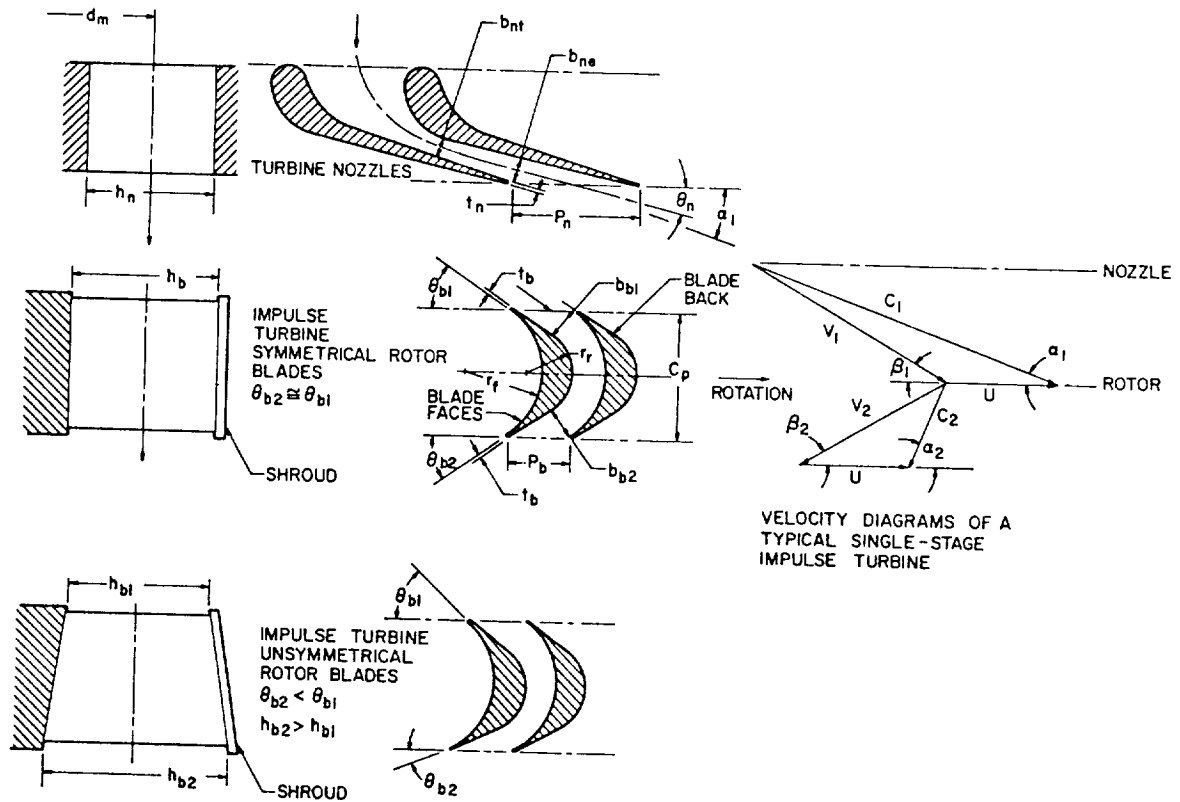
Nozzles, rotor blades, and velocity diagrams of a typical single-stage impulse turbine.
